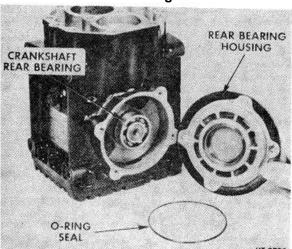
Crankshaft Rear Bearing Housing and O-Ring Seal Removed
